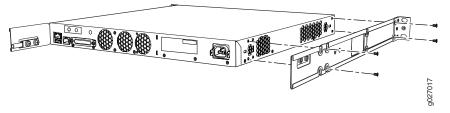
Attaching the Front-Mounting Bracket to the Side Mounting-Rail
